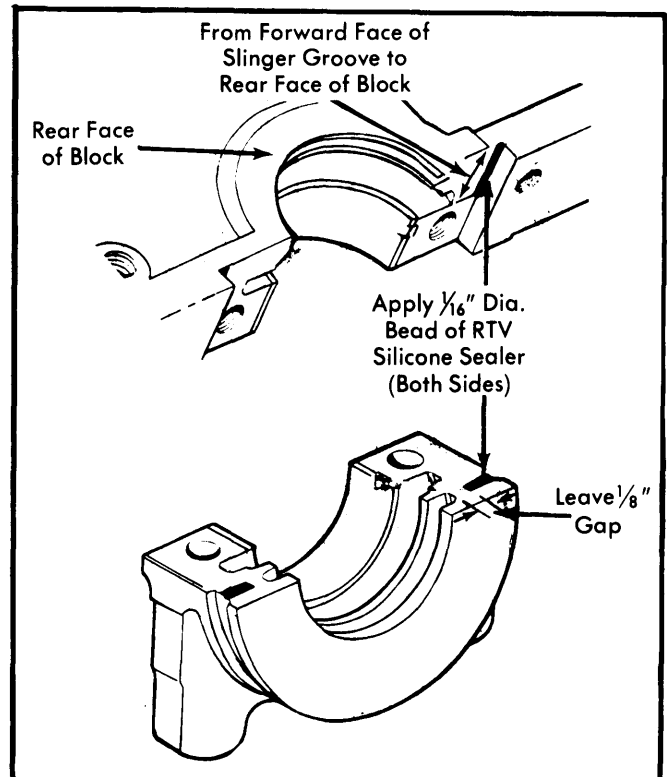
Applying Sealer to Main Bearing Cap and Block
